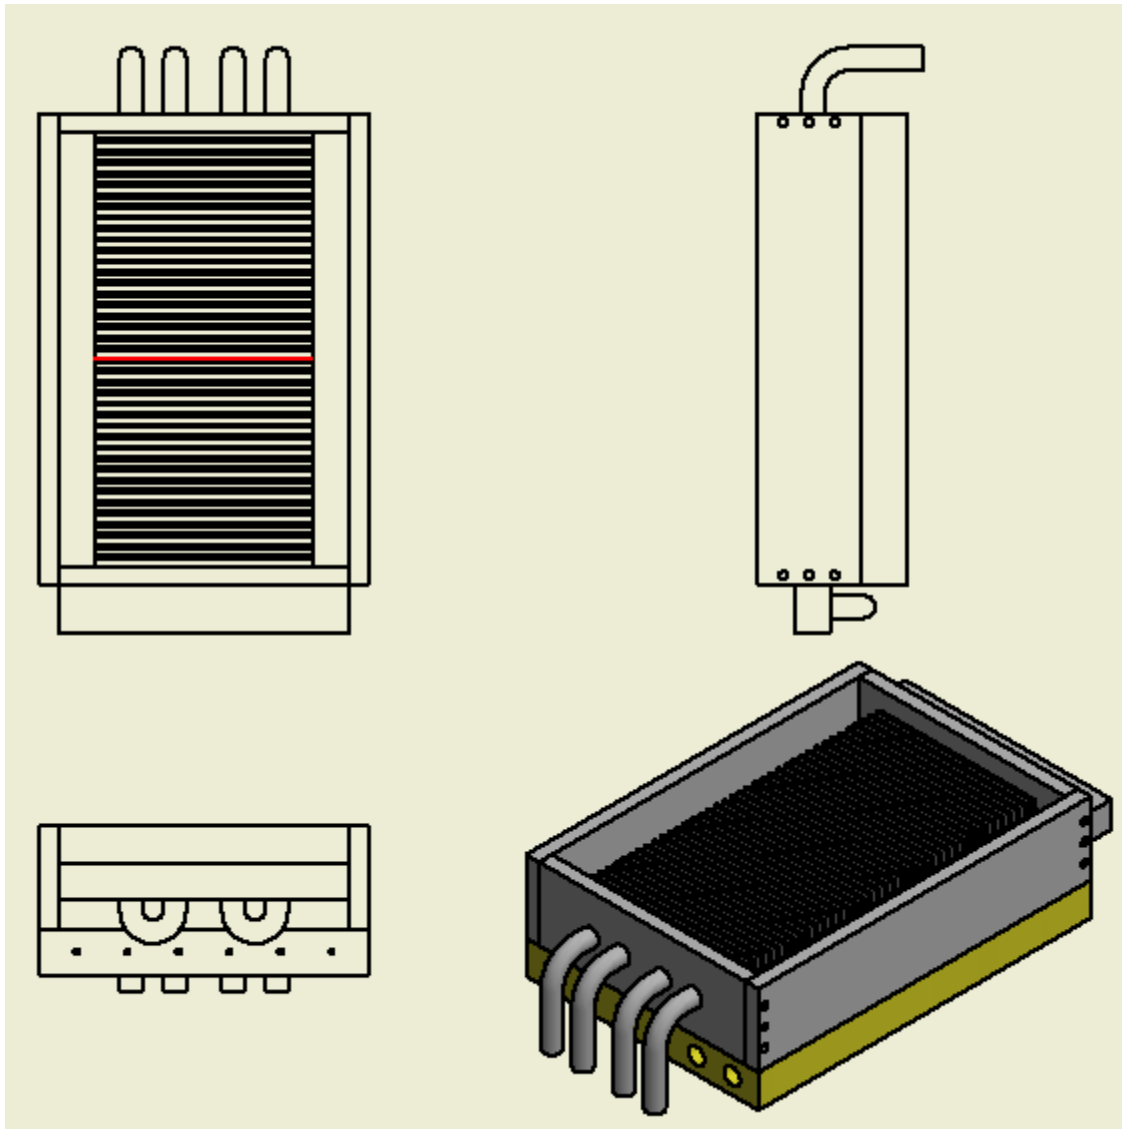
CAD drawing of the assembled second version LiMIT trenches
